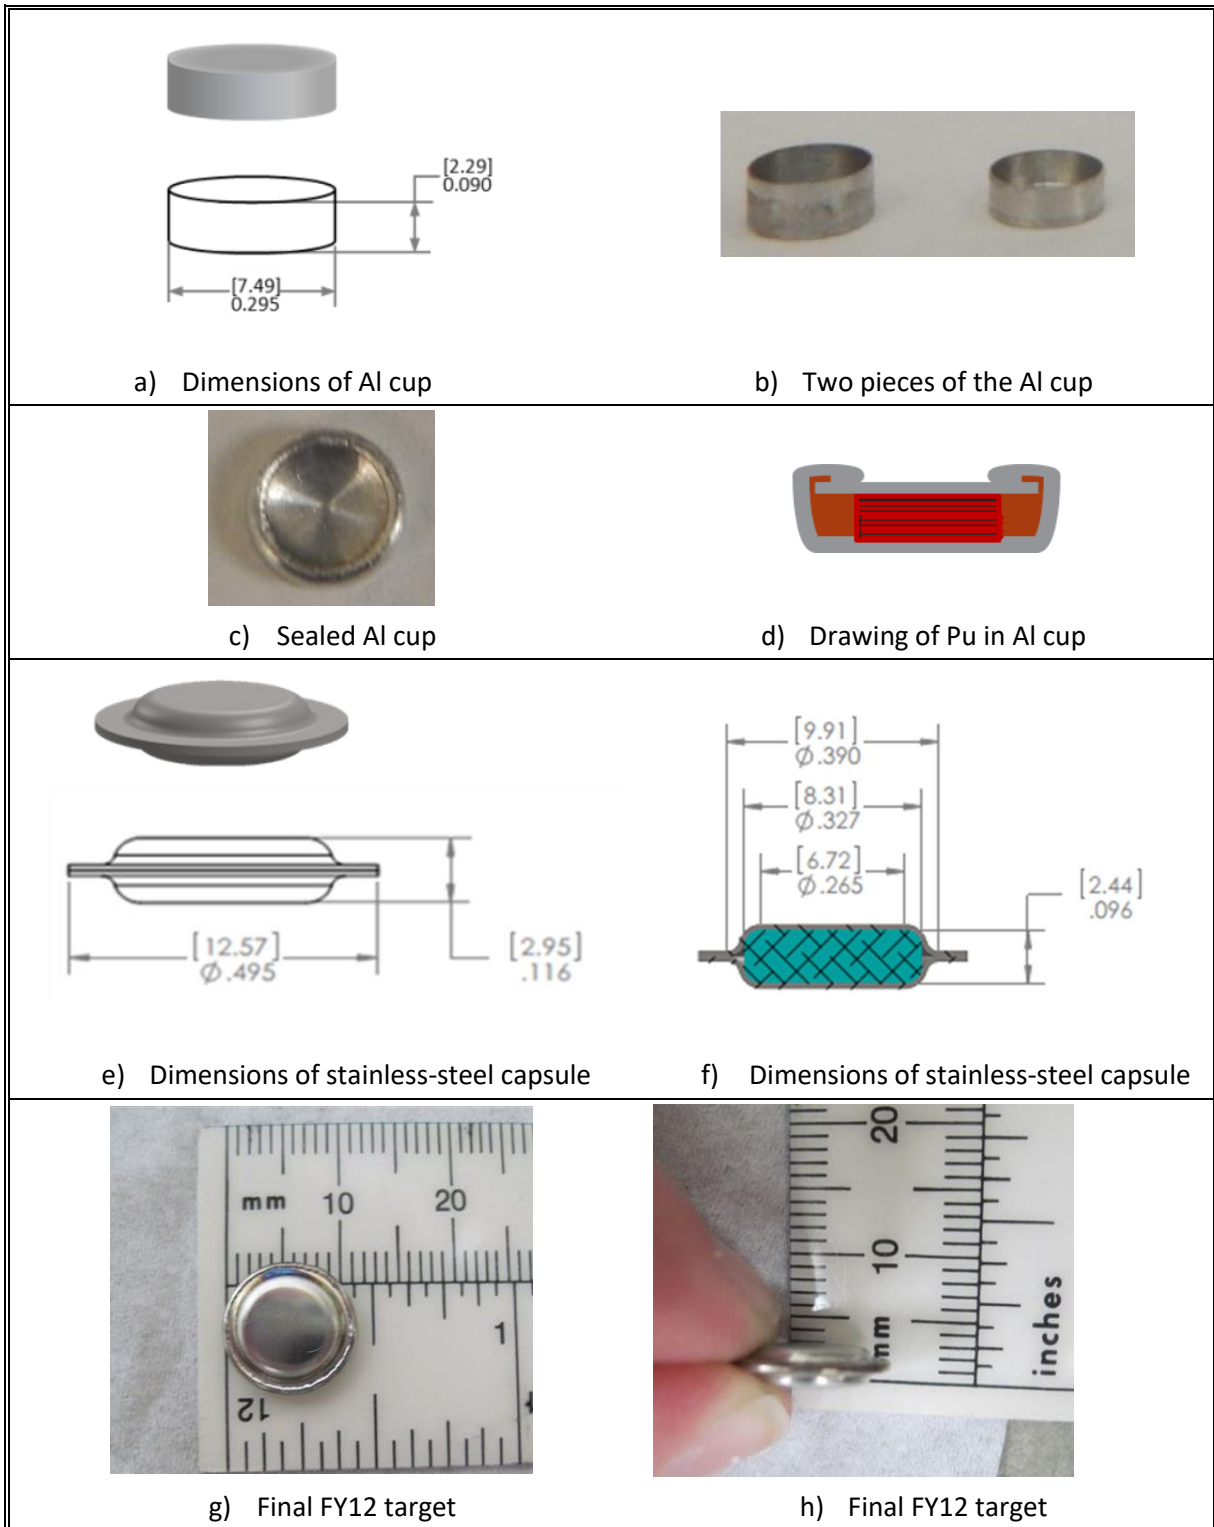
Components of the Pu target including the Al cup and stainless-steel capsule
